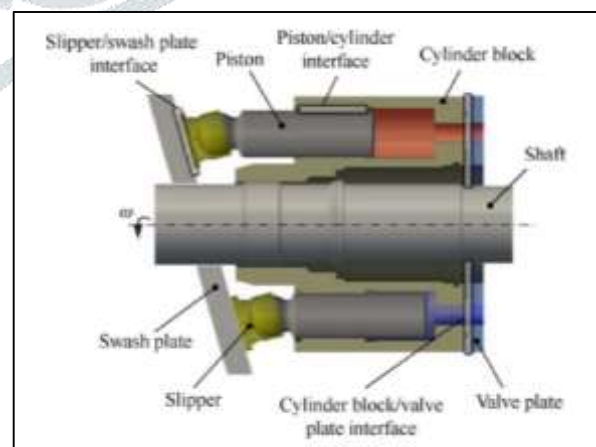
Lubricating interfaces in swash plate type axial piston machines [30]
